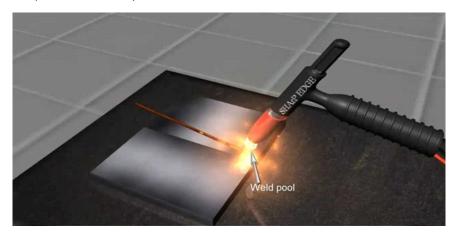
Gas-Tungsten arc welding
